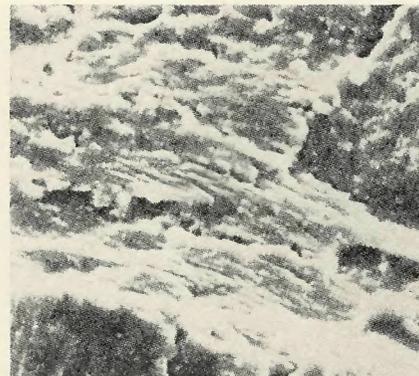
Fracture surface of joint fatigued in air—specimen W-22. X2000 (reduced 38% on reproduction)
